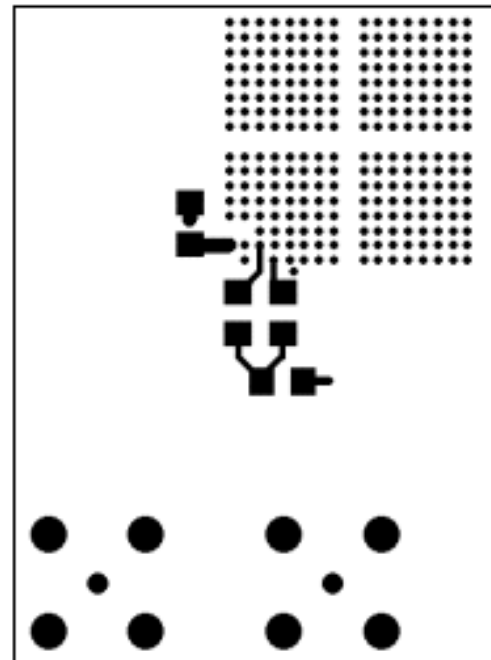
E1x1 75Ω impedance -- Bottom conducting layer layout
